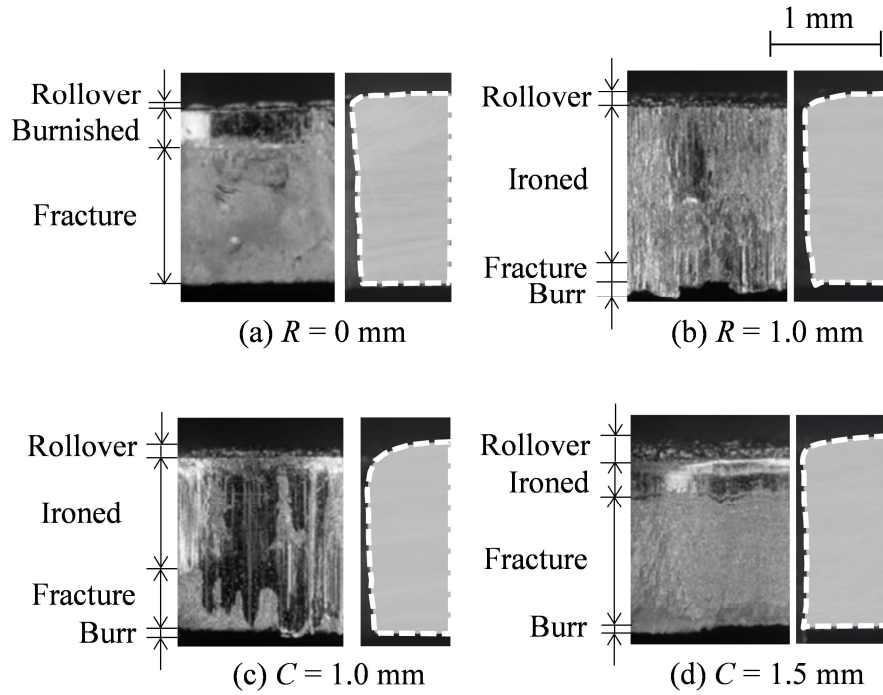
Jointed surfaces and cross-sections for different corner shapes.
